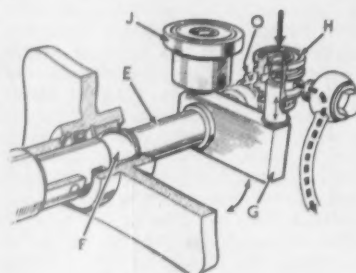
Details of the valve block assembly of Fig. 4, showing only two of the valves
